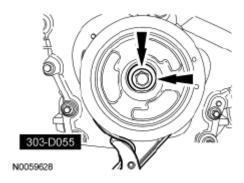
Locating Crankshaft Bolt And Washer Courtesy of FORD MOTOR CO.
